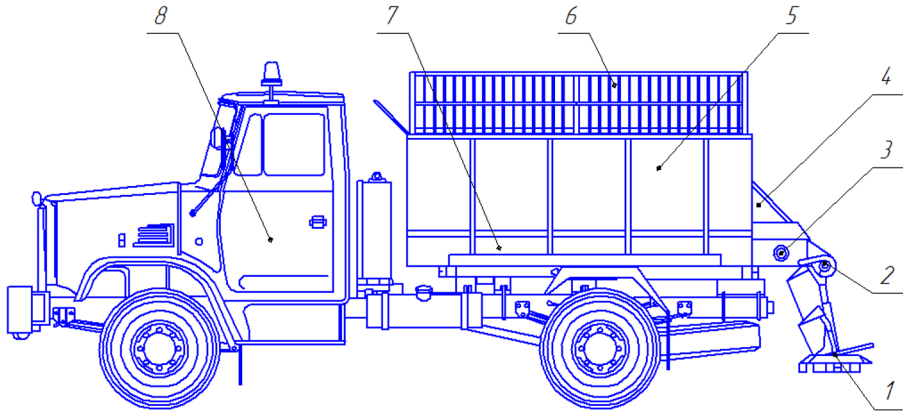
Distributor of technological materials: 1-sowing (distributing) disc; 2- disk reducer; 3- delivery mechanism reducer of the feeding mechanism; 4- roof barrier; 5th bunker; 6 - fence; 7- delivery mechanism; 8 - the main machine.
